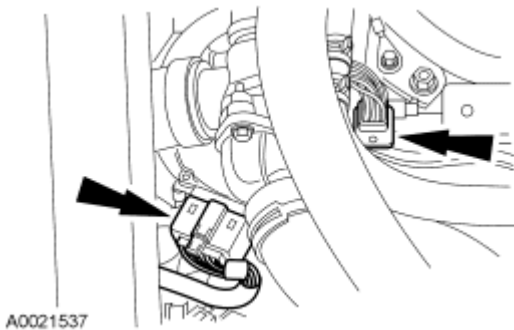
Locating Transaxle Wiring Harness Electrical Connector
